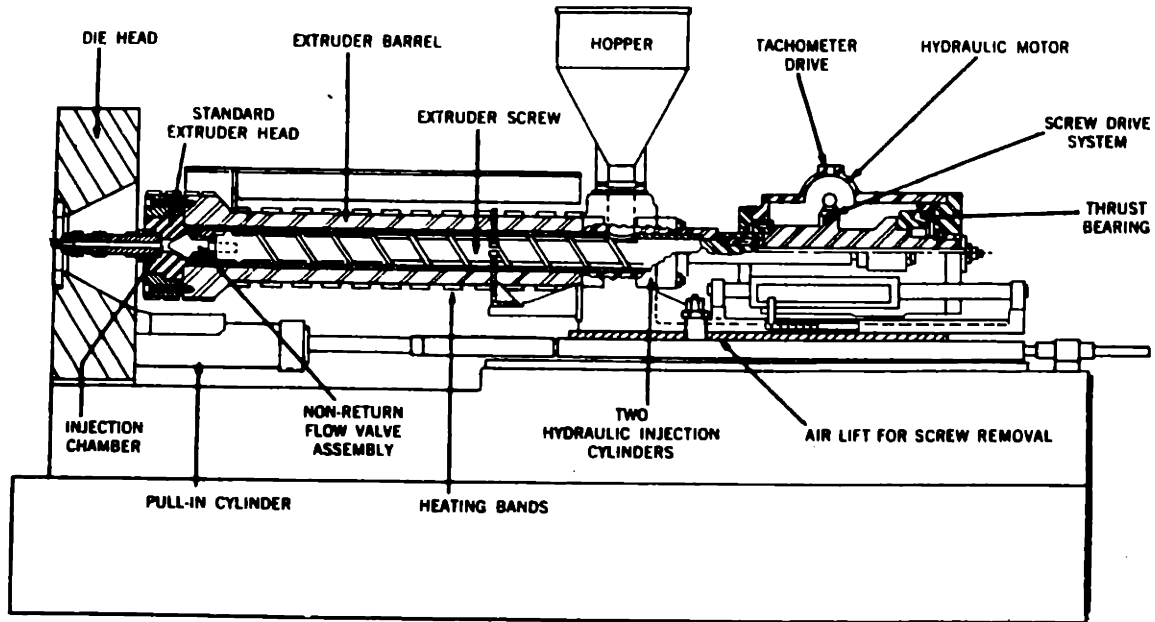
Schematic drawing of the injection end of a reciprocating screw machine.
